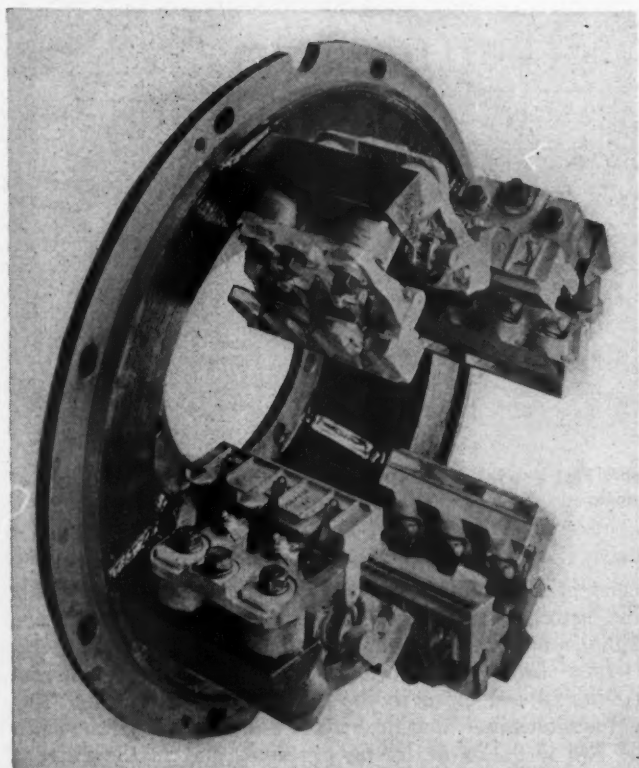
The commutator end housing of a Type 431-A motor, complete with brushholder supports and brushholders
